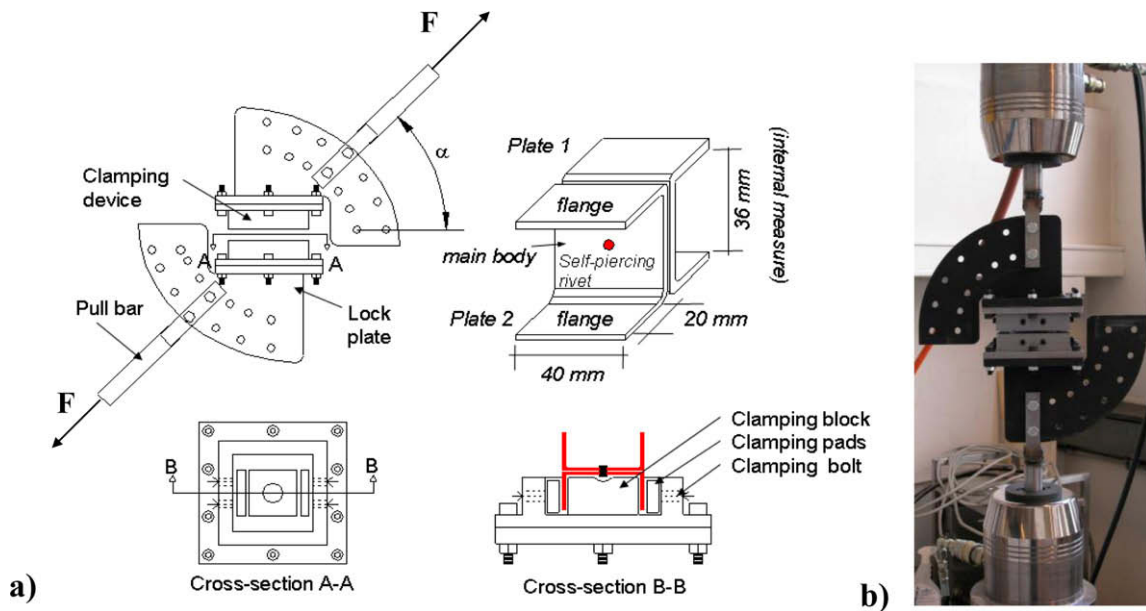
(a) Geometry of the test fixture and U-shaped specimens. (b) Test set-up for pure pull-out test (Porcaro et al., 2004).
